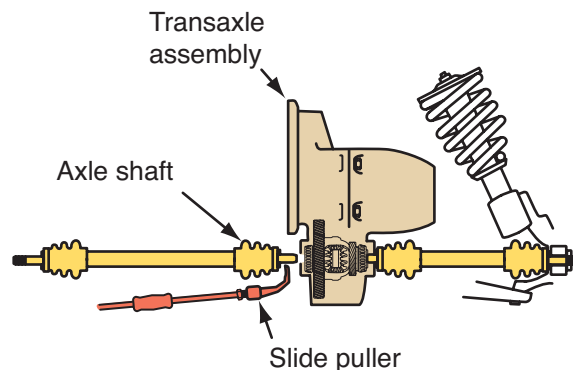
The inboard joints are normally pulled out of the transaxle.
